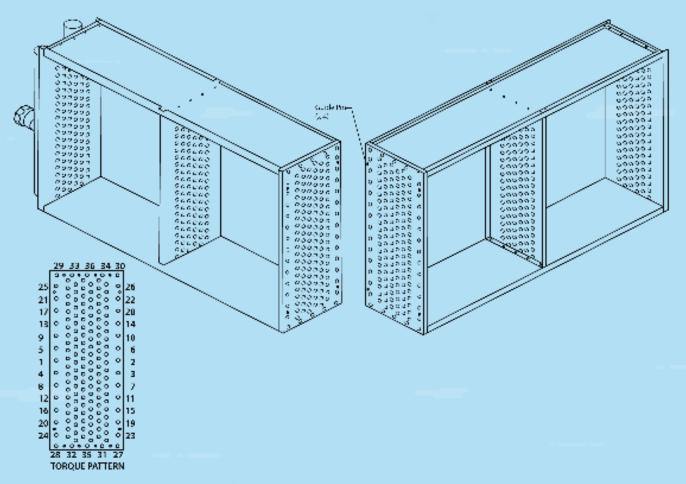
Representative Drawing of Sectional Coil Assembly With Torque Pattern
